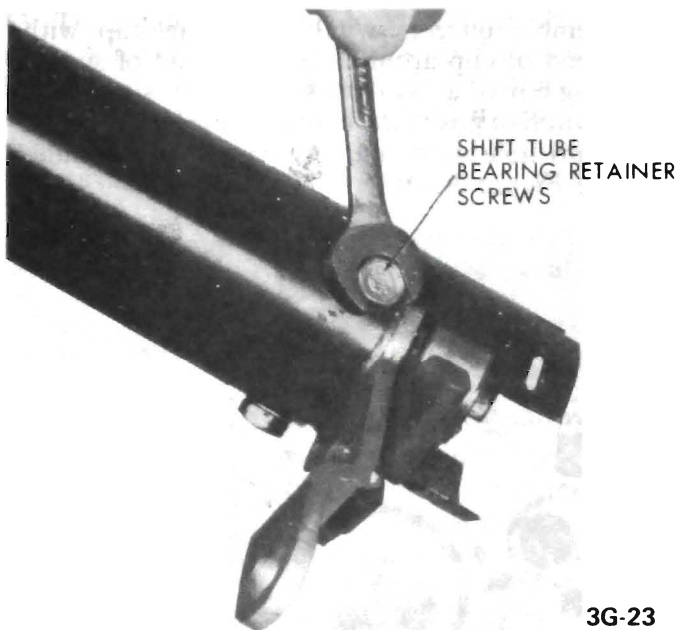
G-44 Removing Screws from Shift Tube Bearing-Manual Transmission
